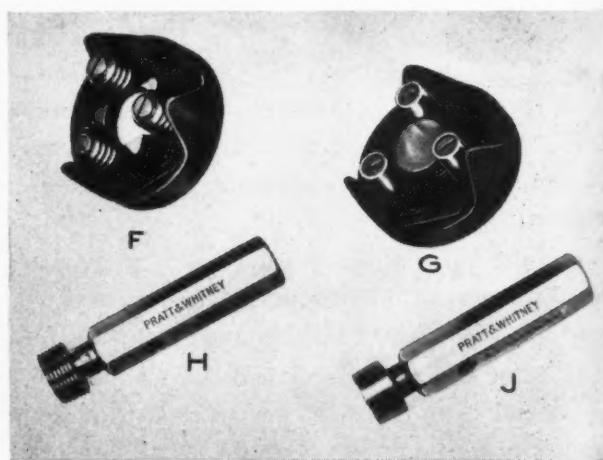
(F) P&W "Tri-Roll" Gage for Checking Lead, Taper, and Pitch Diameter of External Threads (G) "Tri-Roll" Gage for Checking Taper and Diameter of Threads at Crest. (H and J) Plugs for Setting Gages F and G
